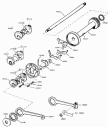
GEARBOX ASSEMBLY (PART 1)
